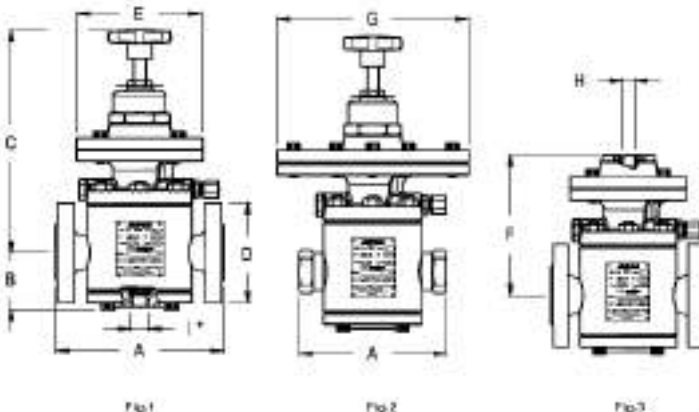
Valve with standard design; Fig. 2 - Valve with low pressure top; Fig. 3 - Valve with compressed air top.
